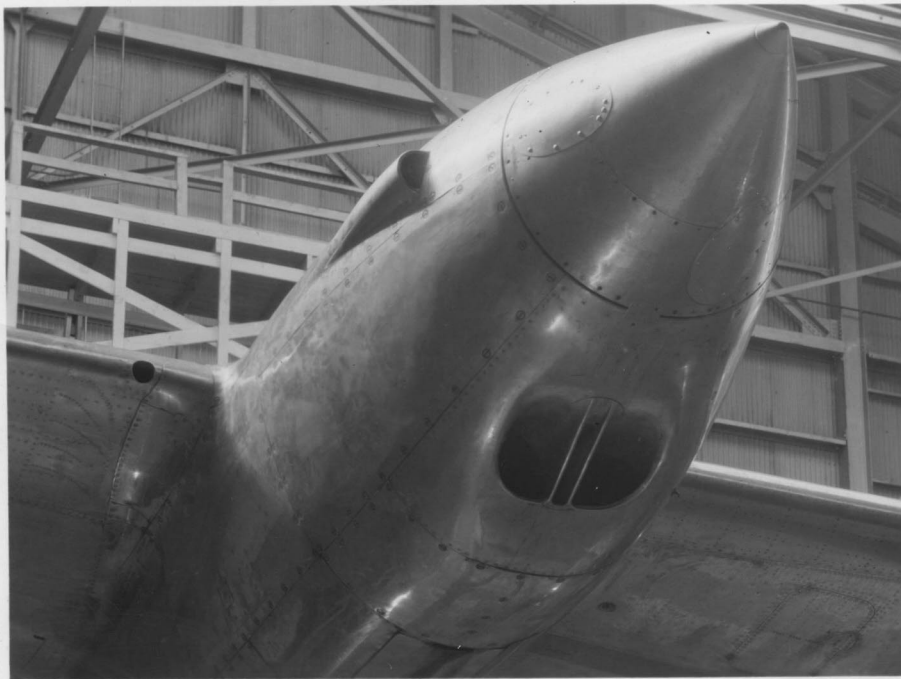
Oil-cooler inlet and outlet of the YP-38 and P-38E airplanes.
